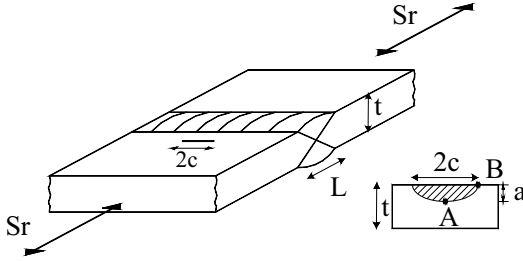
A semi-elliptical crack in a steel plate at/near the weld toe.
